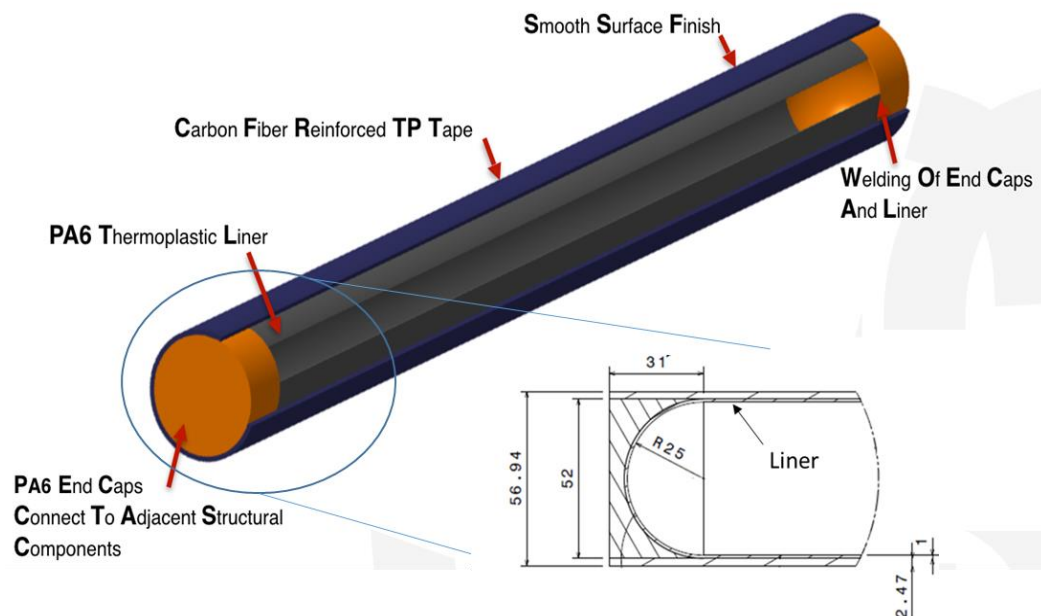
Initial Integrated End-Cap and CPV (Dimensions in Millimeter)
